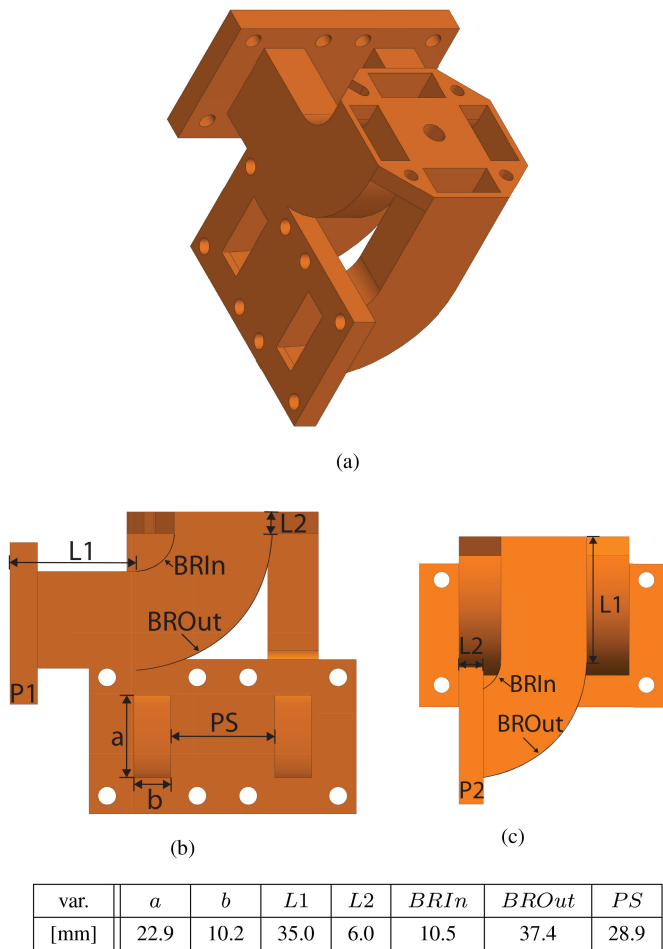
Feed bend to combine each feed path into a common flange. (a) Isometric view, (b) Side-view showing the path of port 1, and (c) Side-view showing the path of port 2.
